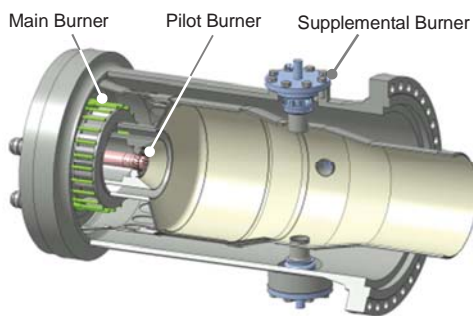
DLE combustor geometry of Kawasaki gas turbine
